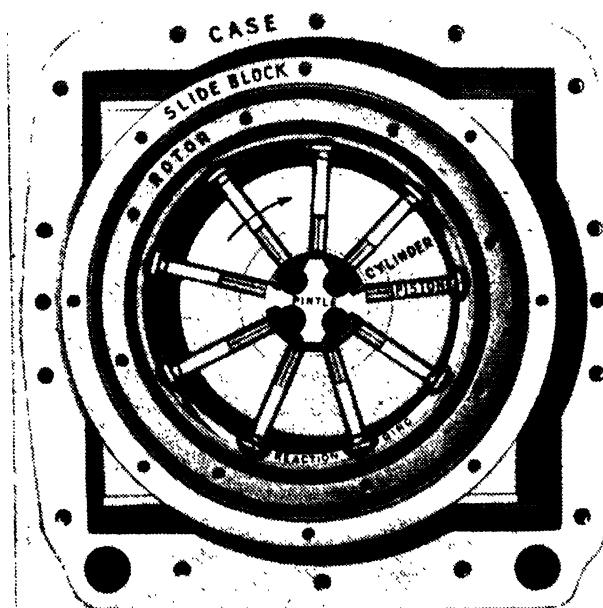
Maximum-stroke position of Oilgear pump, left-hand. (*The Oilgear Co., Milwaukee, Wis.*)
